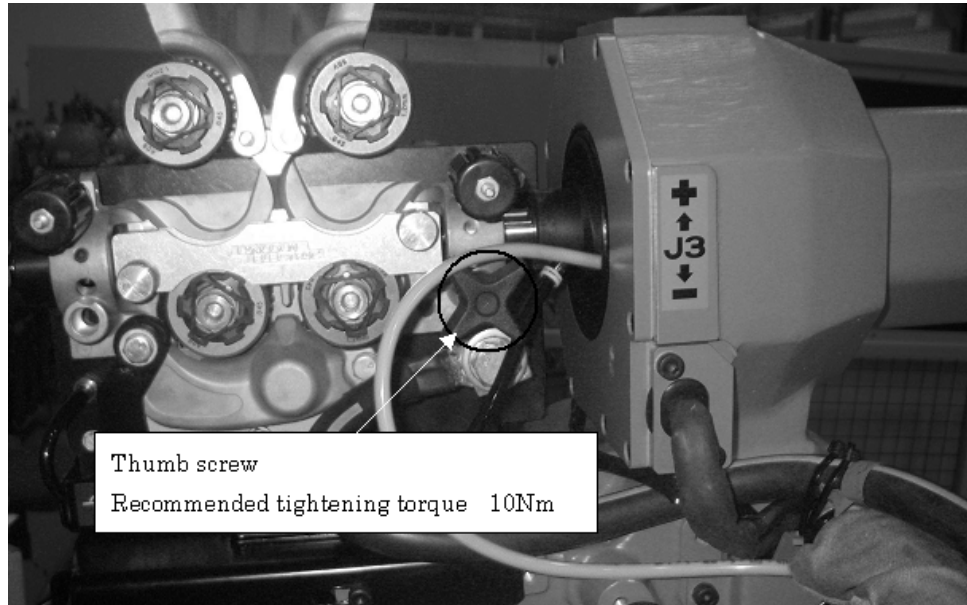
(h) Torch cable changing tool attaching position
